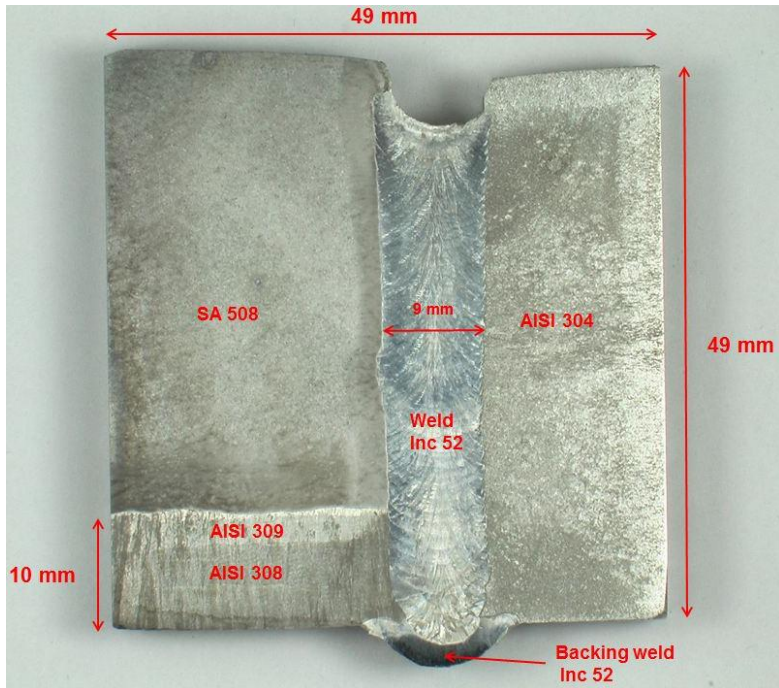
Cross-section macrograph of the narrow-gap GTAW DMW weld (NG-DMW): weld metal Alloy 52, ferritic steel SA508 (with cladding Type 309 + 308), austenitic stainless steel Type 304.
